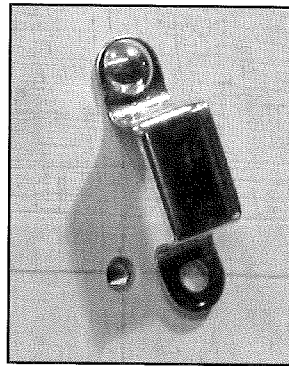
A trunk handle loop is fitted with a threaded rivet. Notice the brass insert is seated just below the surface.
